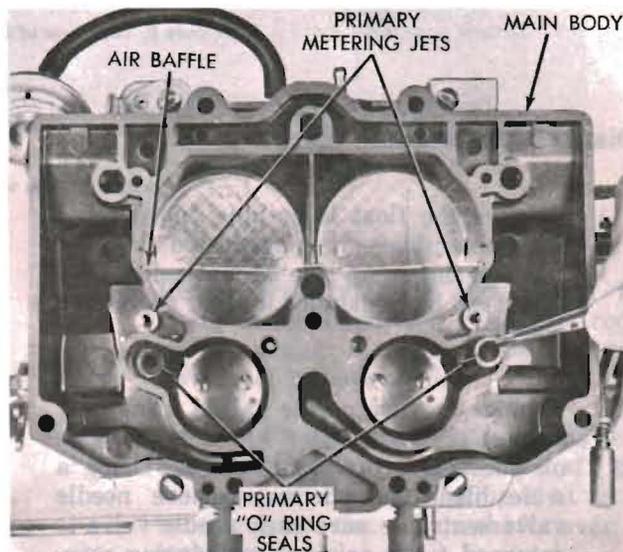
Removing or Installing Primary "O" Rings and Metering Jets—Slide 2171
